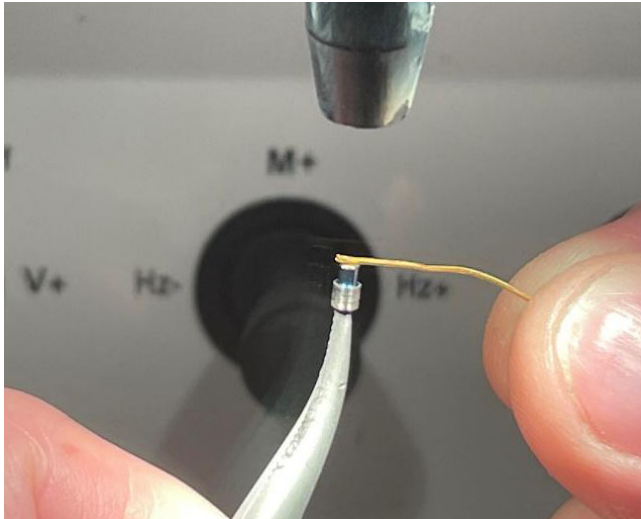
Au wire applied to the surface of the titanium screws before welding
